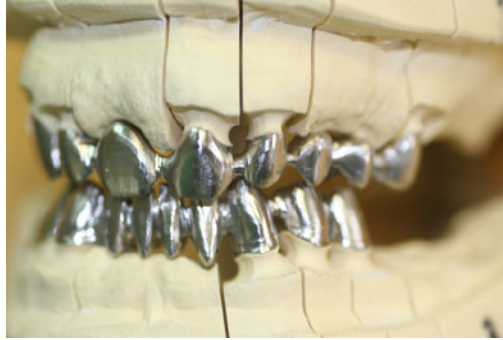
Metal pieces manufactured by a dynamic high-precision machining centre with five axes
